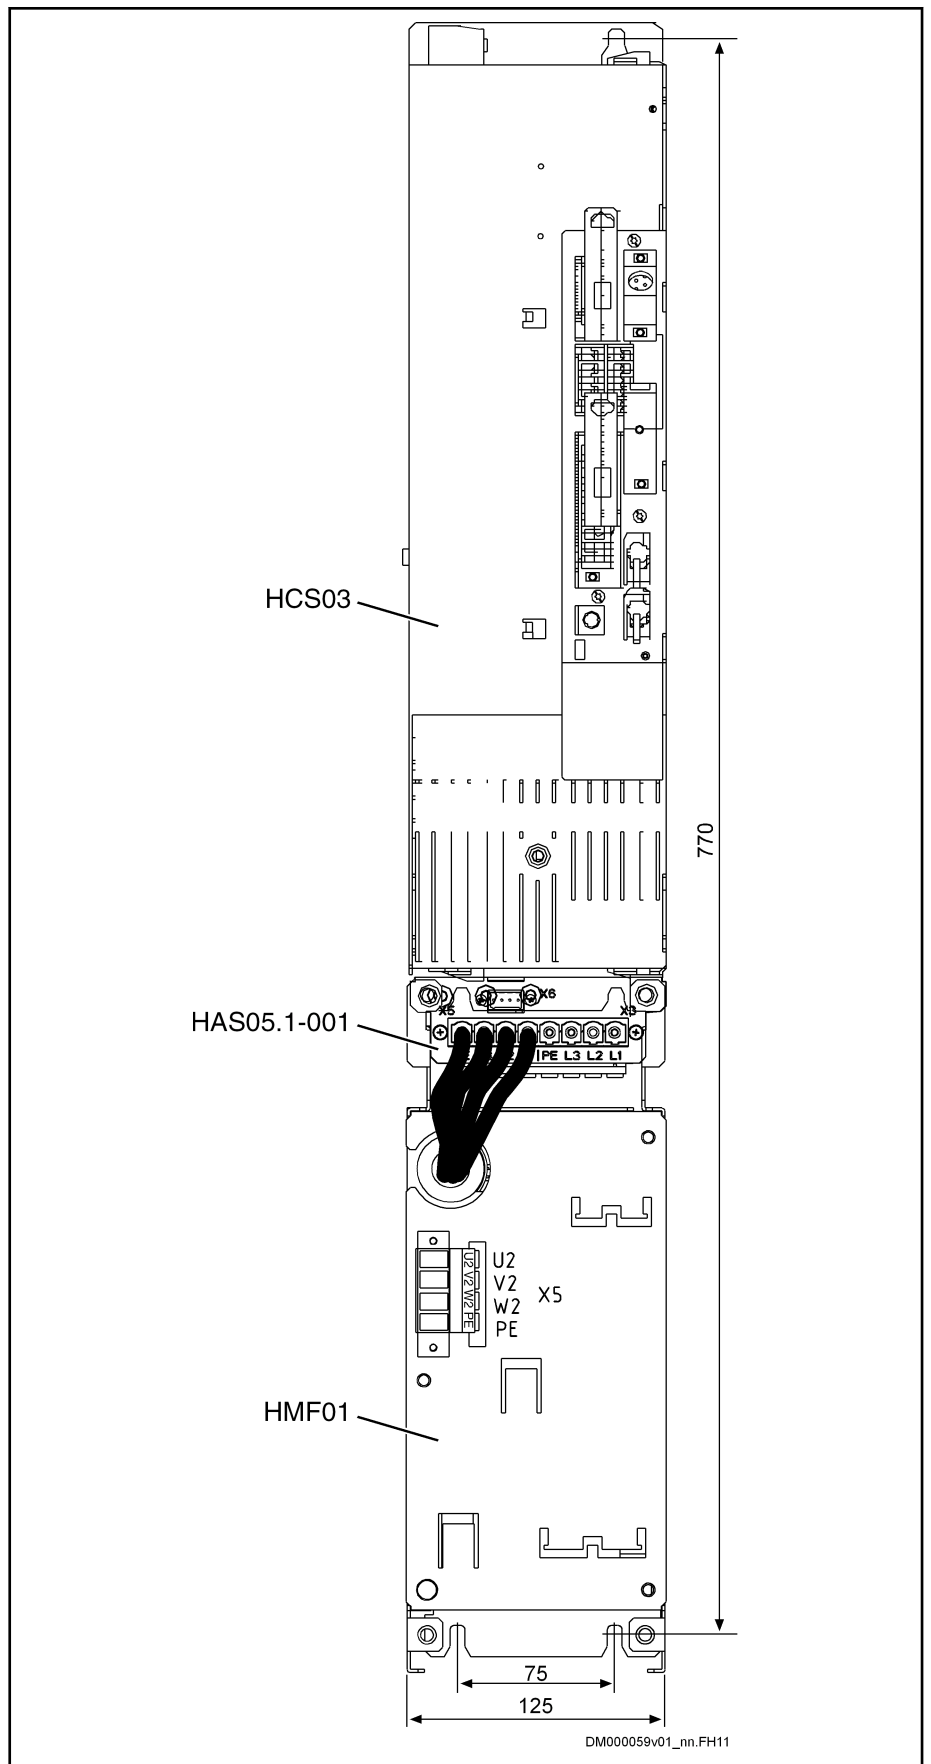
Mounting example HCS03.1E-W0070 / HMF01.1A-D0K2-D0045
